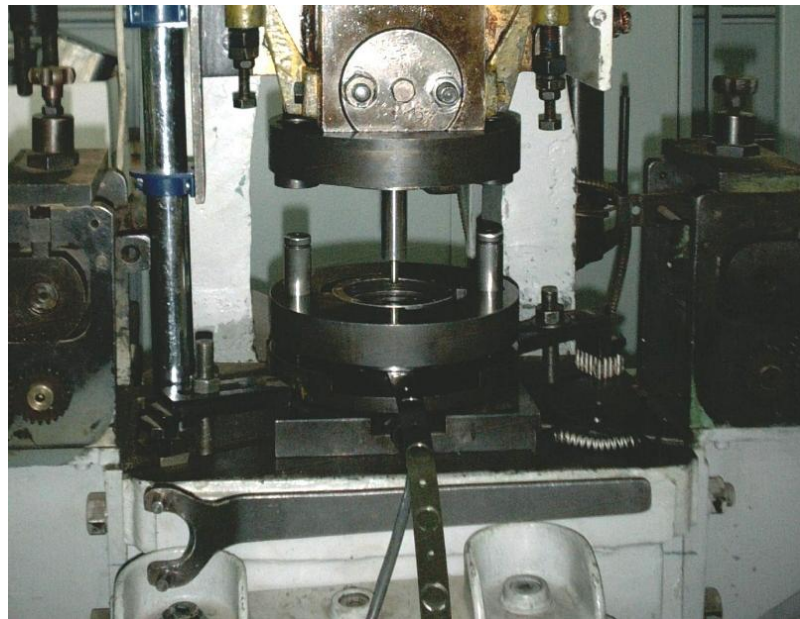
Active Tooling Elements for Deep Drawing – Examples
